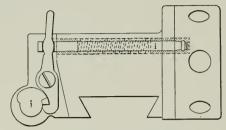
End View of Turret Slide Showing Locking Pin for Turret
